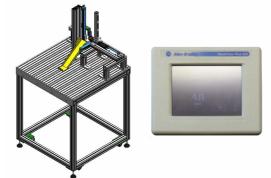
Graphic design of the Post 3 – Inserting bearings rack (A). PanelView Plus 600 (B).
